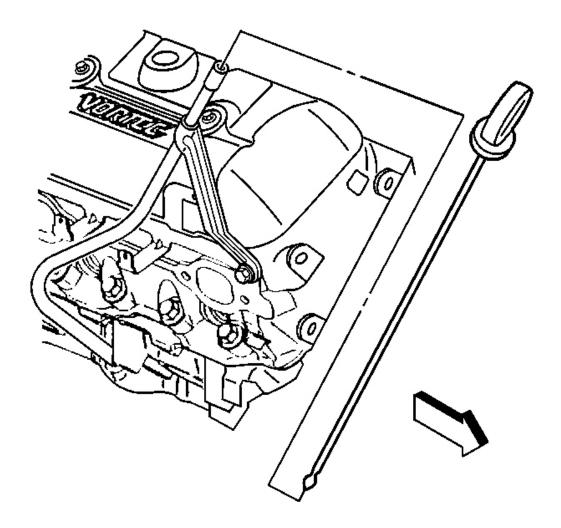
Locating Oil Level Indicator Courtesy of GENERAL MOTORS CORP.
